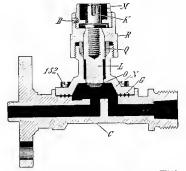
Section Through Filling Valve No. 65, Fig. 2108.
